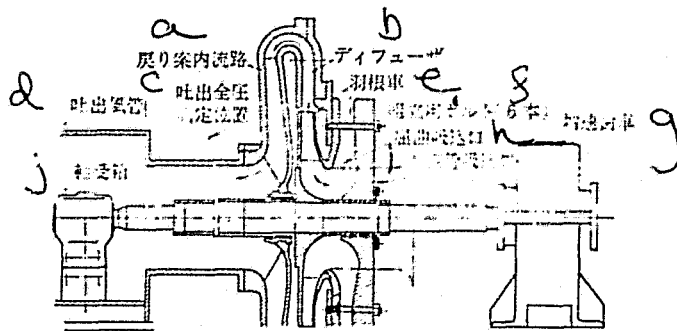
Centrifugation fan used in flow path tests. a--guide path; b--diffuser; c--emission pipes; d--emission pressure measurement position; e--runners; f--assembly bolts (6); g--acceleration gears; h--outlet; i--inlet j--bearing case
